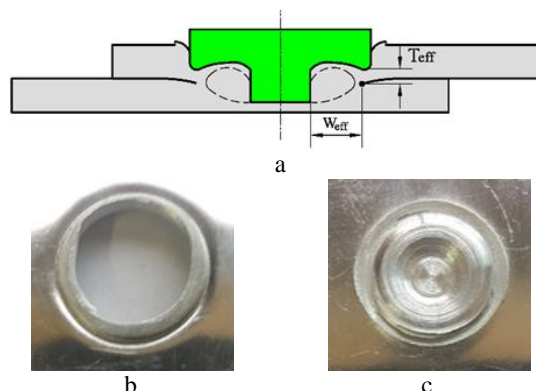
a) Schematic of joint section leading to nugget pull out b) bottom view of upper sheet c) top view of lower sheet
